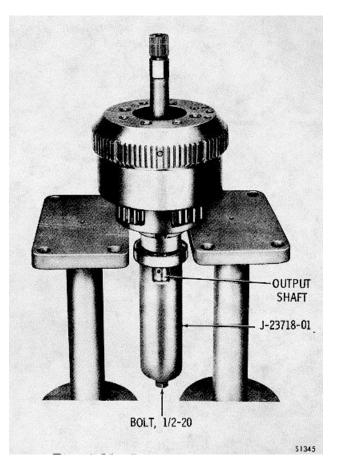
Planetary gear unit assembled for measuring for selective thrust washer
